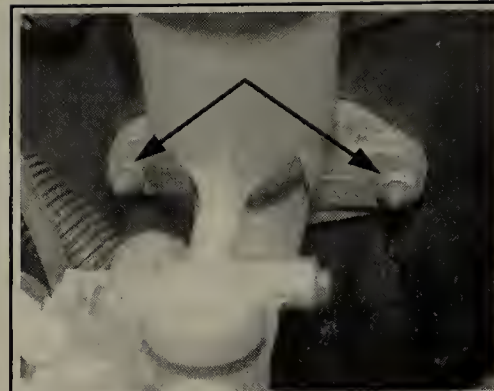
The brake master cylinder is secured to the power booster with 2 retaining nuts
